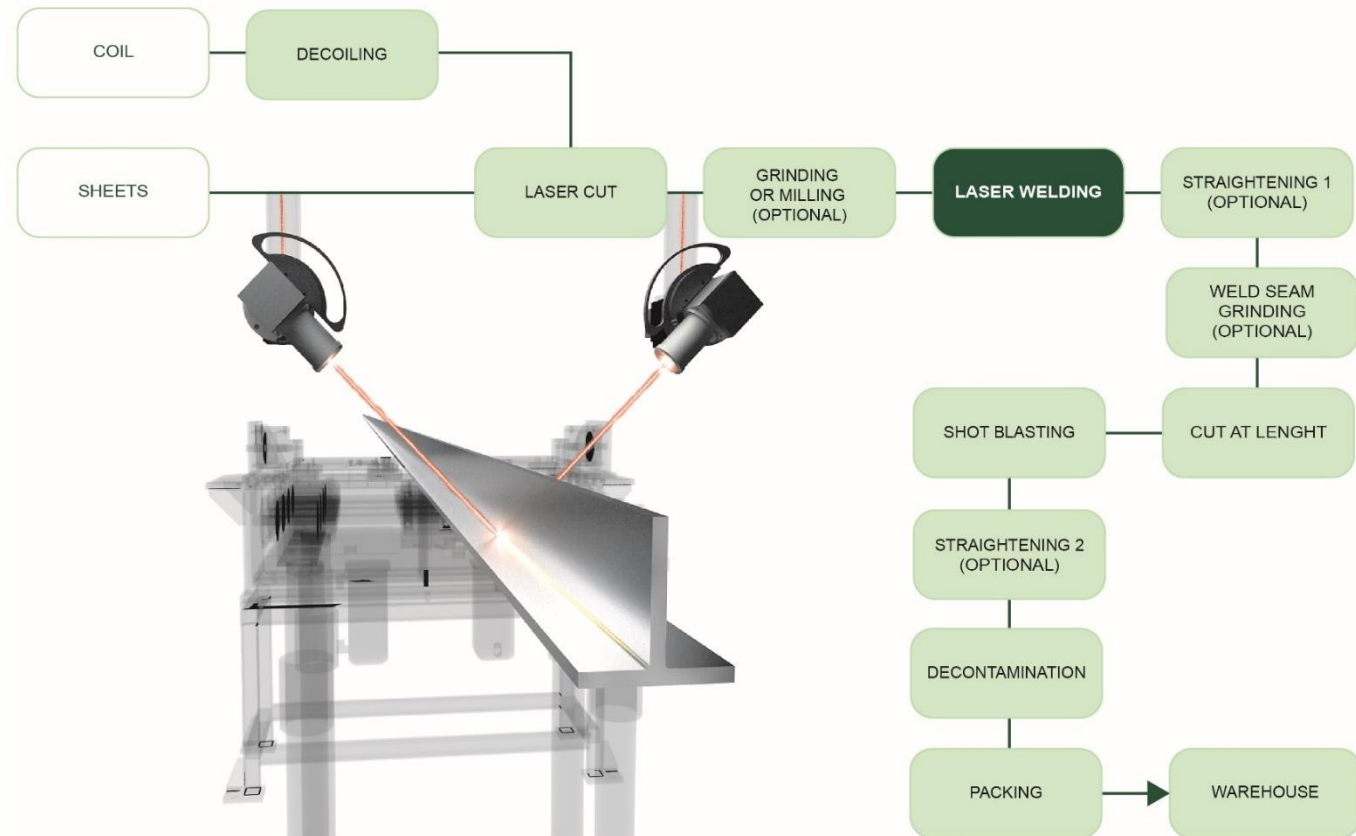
Stainless steel profiles manufacturing process – Laser welding
